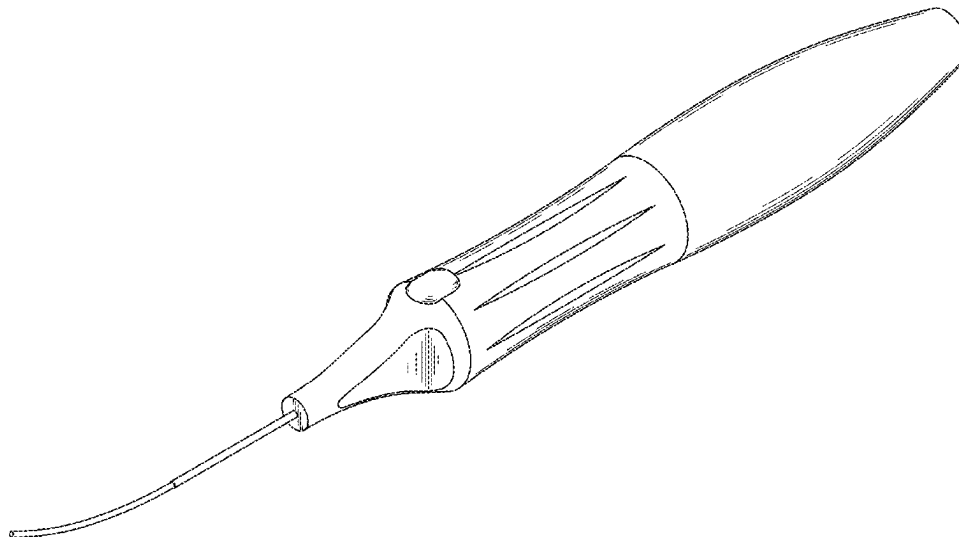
is a bottom view of the multi-spot laser probe handpiece of the present invention.
